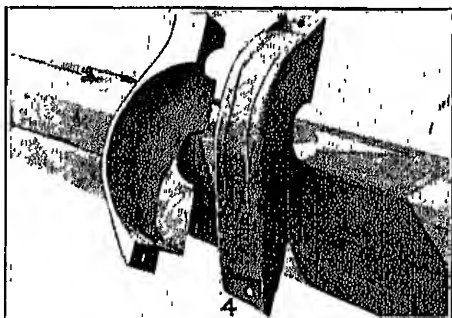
Gear Cases with Patches Welded On.
